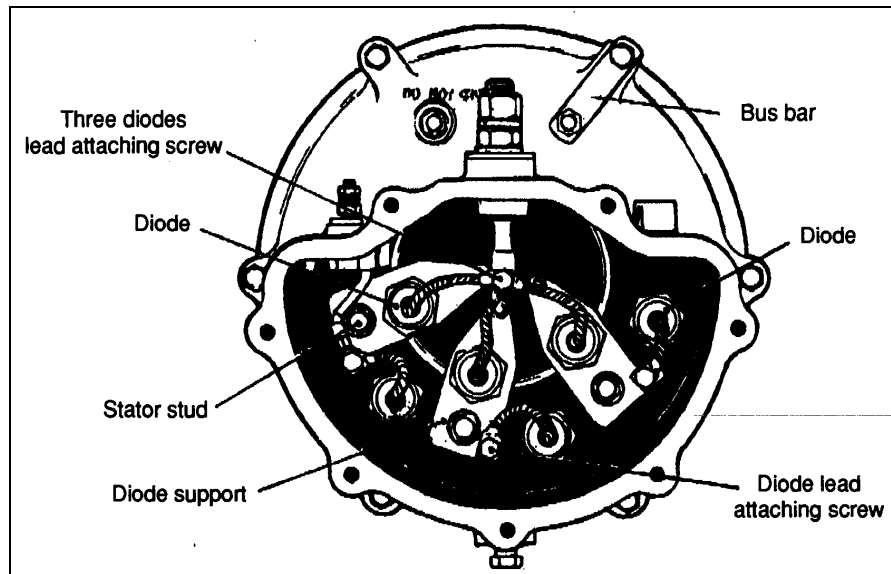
VIEW OF RECTIFIER END FRAME WITH COVER REMOVED
